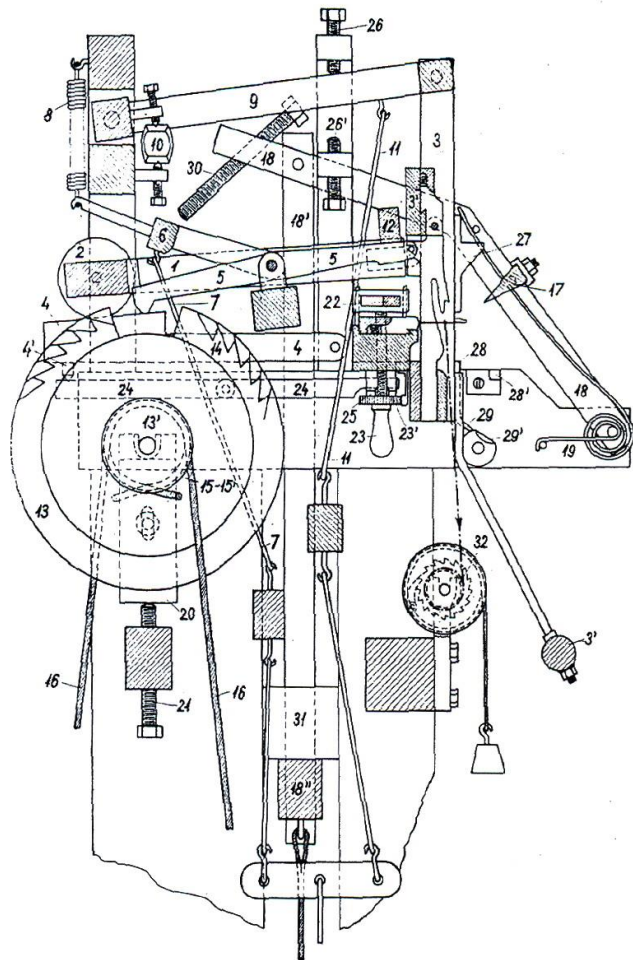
Side view of the upper part of the machine, seen in cross section, with the working side (loop forming elements) at the right.
